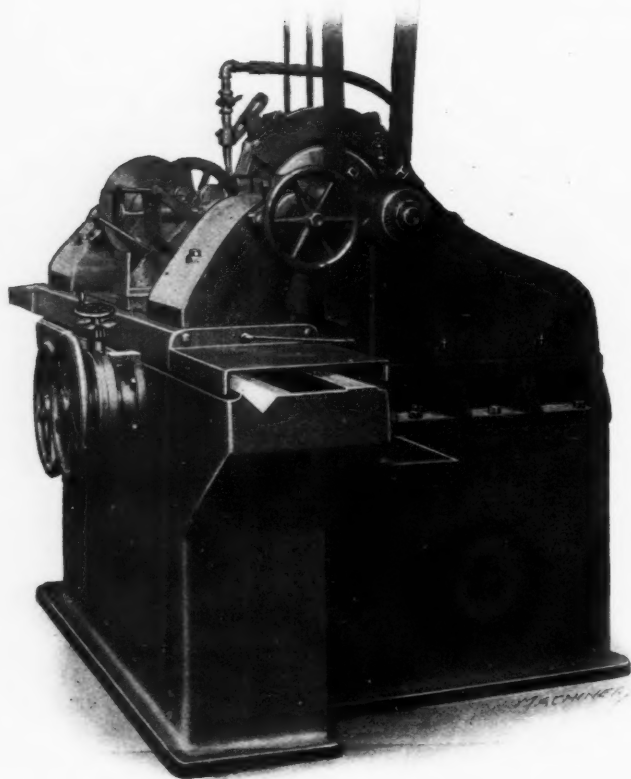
End View of "Sterling" Grinder built by Young, Corley & Dolan, Inc.
